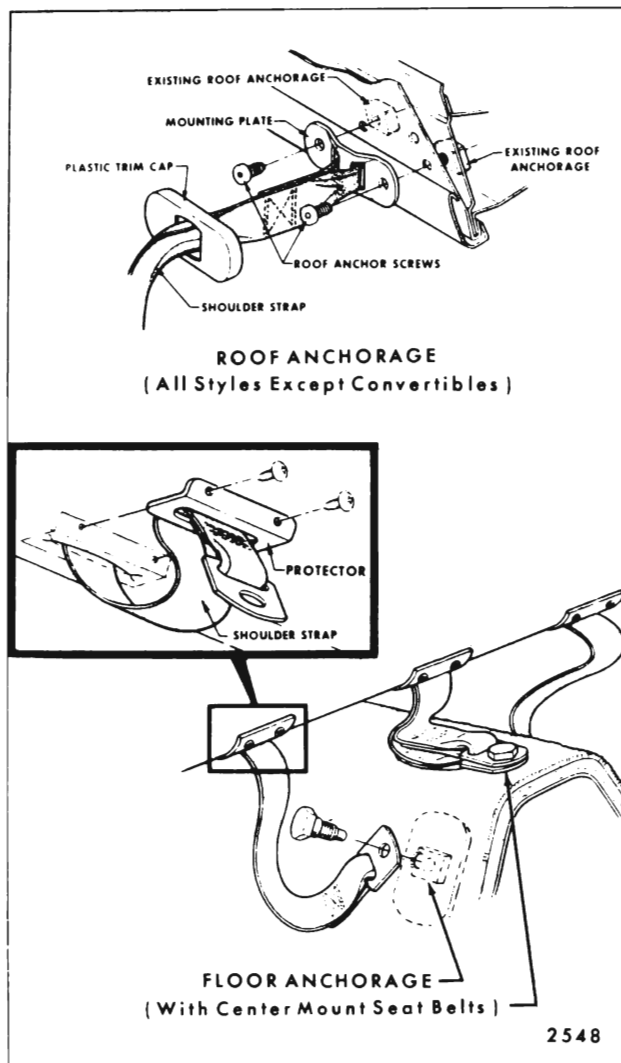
Shoulder Strap Roof Anchorage (All Styles except Convertible) and Floor Anchorage (All Styles)
